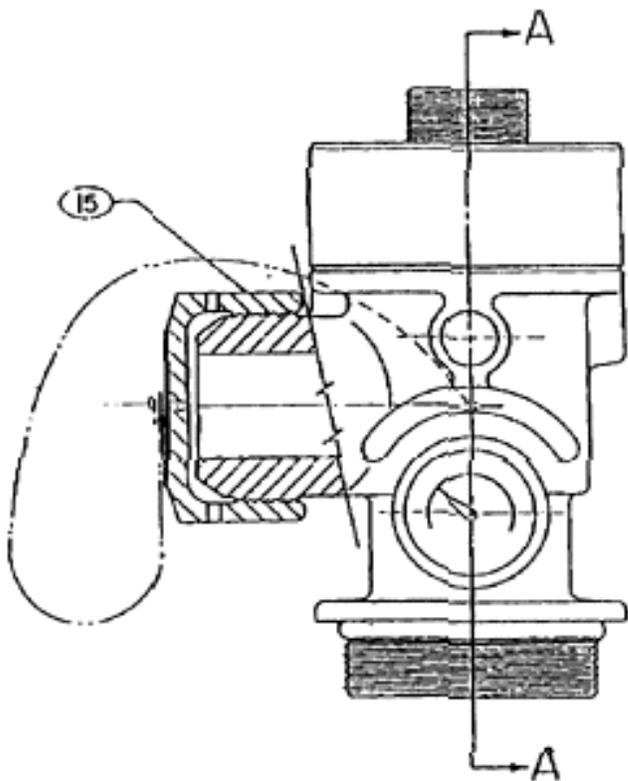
Valve Assembly Cylinder 1.11 in. Halon 1301
